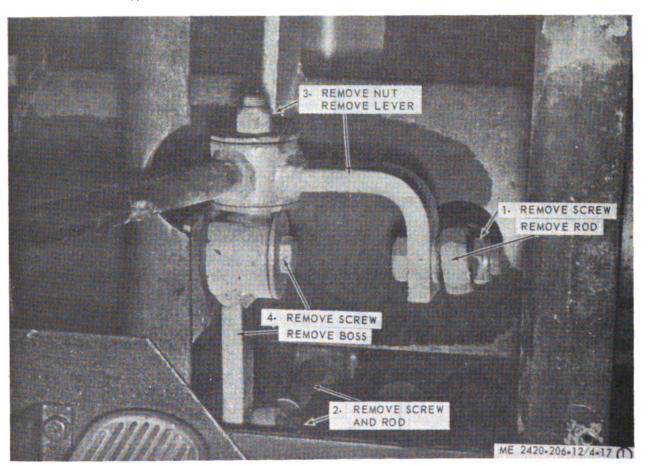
Bulldozer control lever, removal, disassembly, reassembly and installation (sheet 1 of 2).
